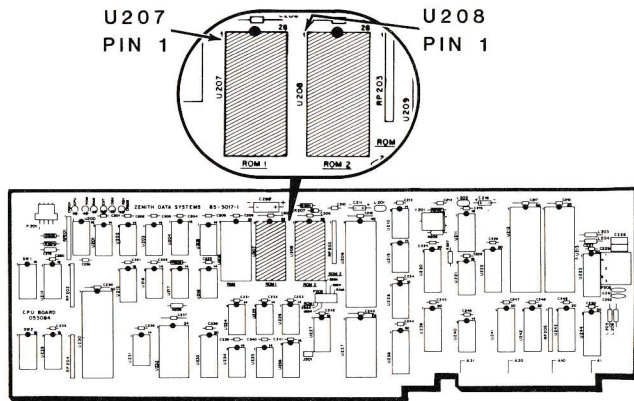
CPU Card (PCB Part No. 85-2889-XX and 85-3017-XX)
